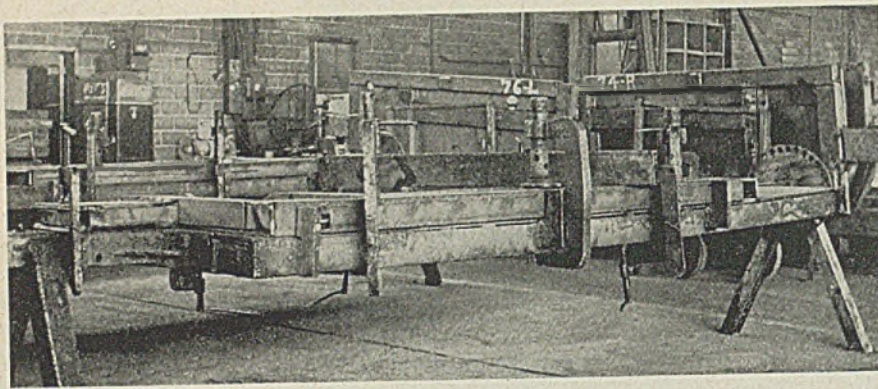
After experimentally determining amount of prebending to counteract distortion from welding, fixture is designed to give bending required. Thus parts come from welding fixture almost straight for the weld distortion is counteracted in the fixture
